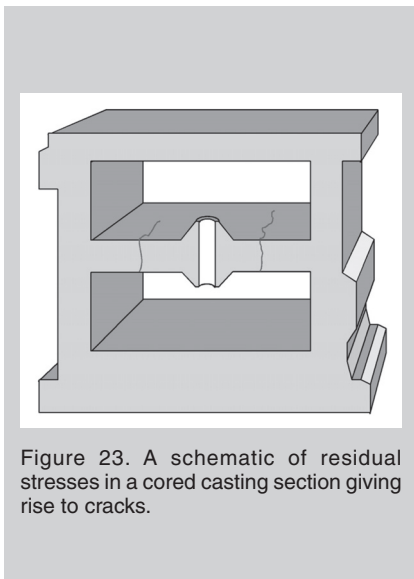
A schematic of residual stresses in a cored casting section giving rise to cracks.
